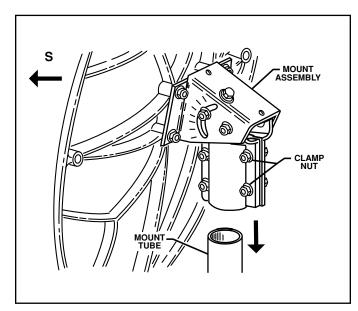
INSTALLING ANTENNA/MOUNT ASSEMBLY ONTO MOUNT TUBE
